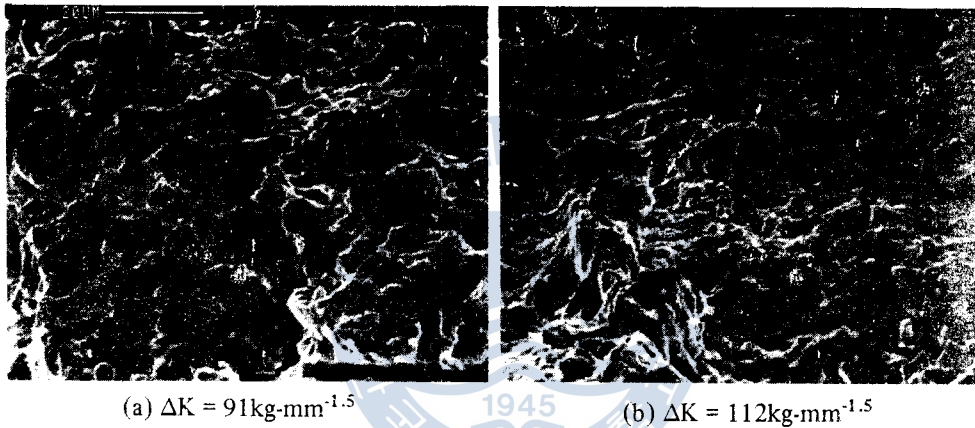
Micro-fractographs of fatigue fracture surface for HT 80 base metal in air
